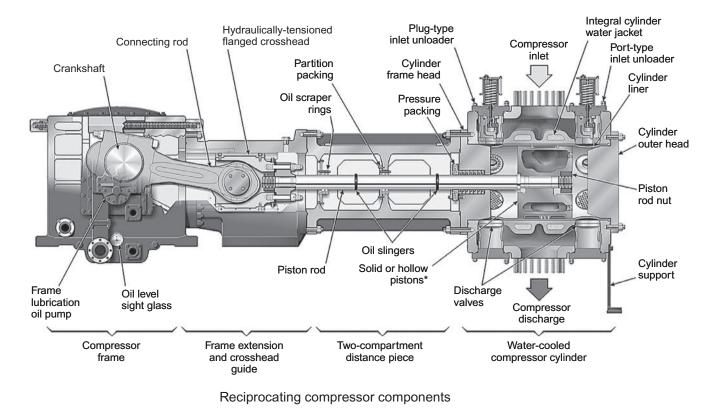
Cutaway of a horizontally opposed reciprocating compressor. Courtesy of Dresser-Rand Corporation.
